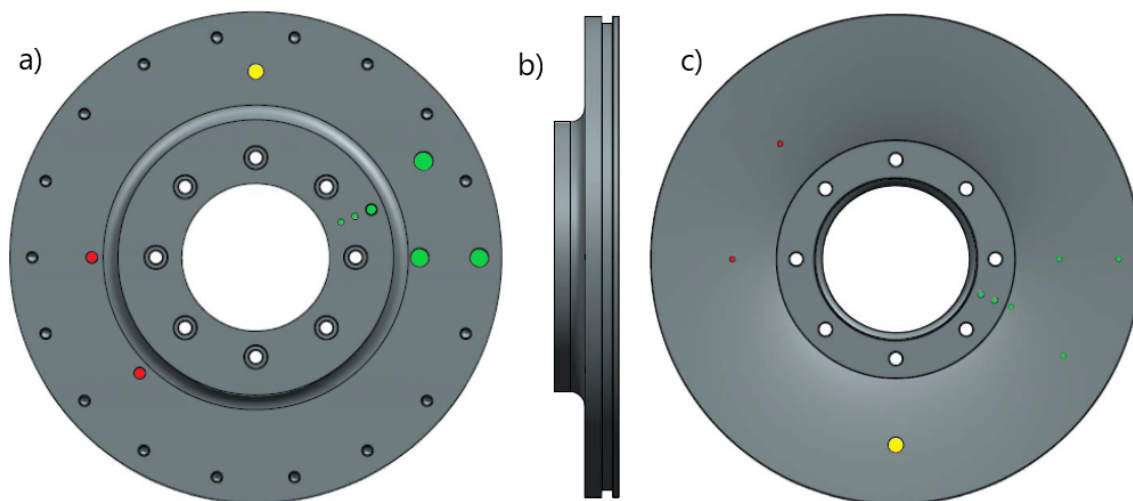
Radial RDE Turbine Channel (a) top, (b) side, and (c) bottom.
